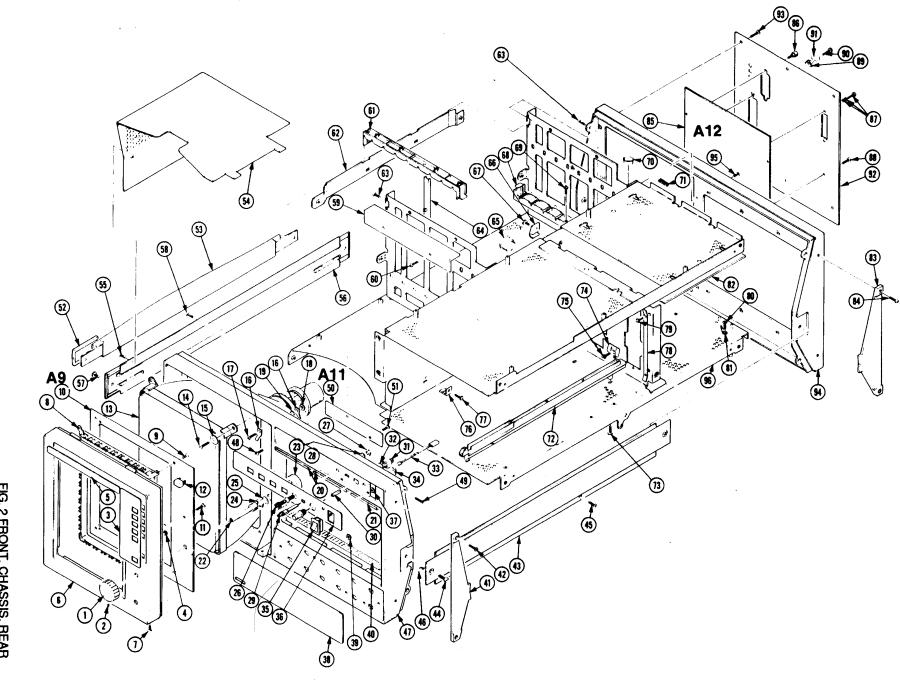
FRONT, CHASSIS, REAR Replaceable Parts - 11401 Service
